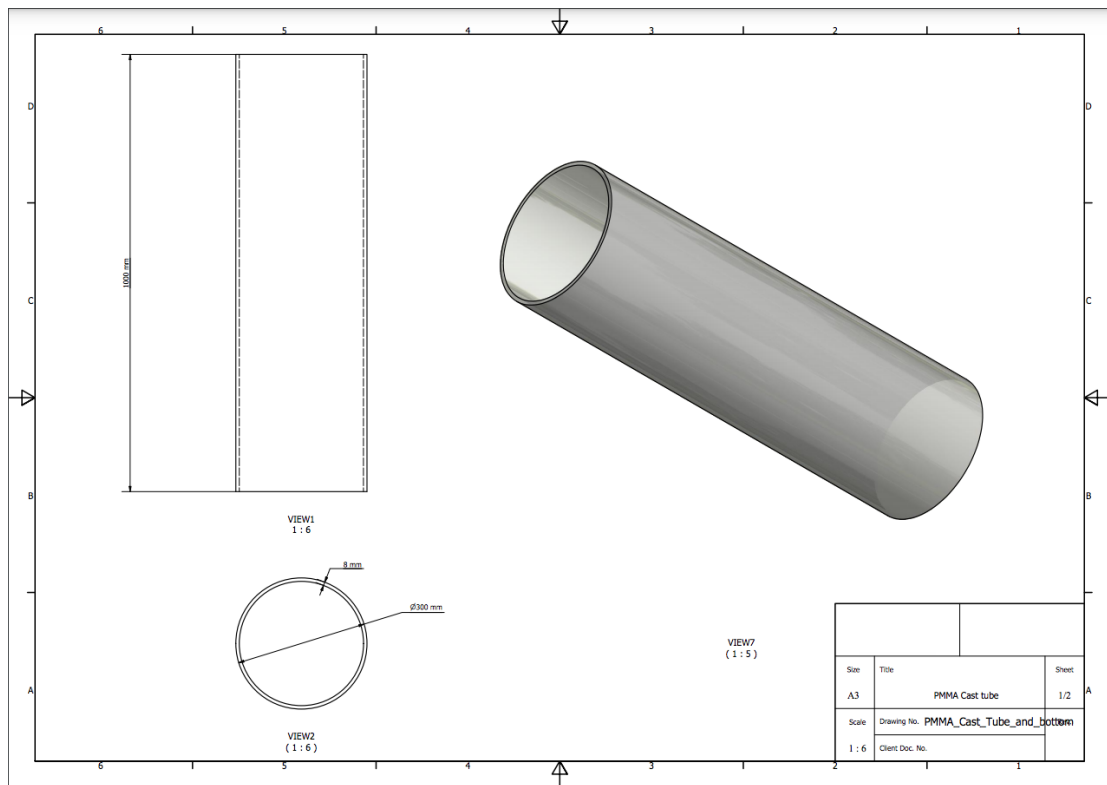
Inventor drawing of PMMA cast tubes, [Ida Haug Færøy]
